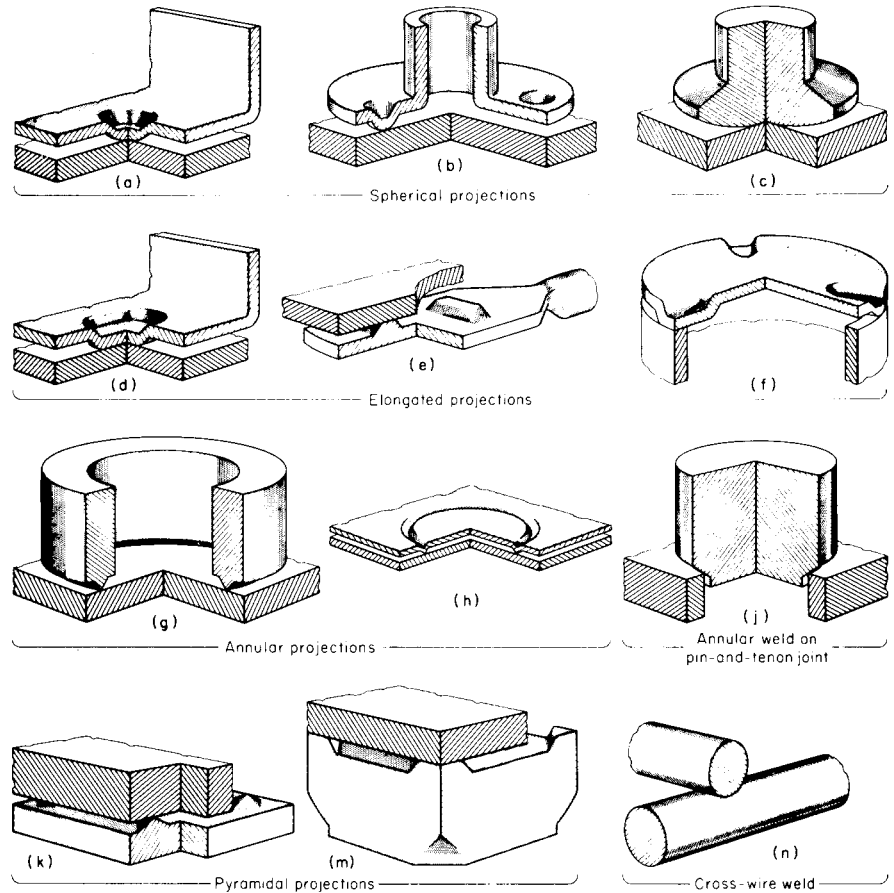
Examples of embossed- and solid-projection welds
